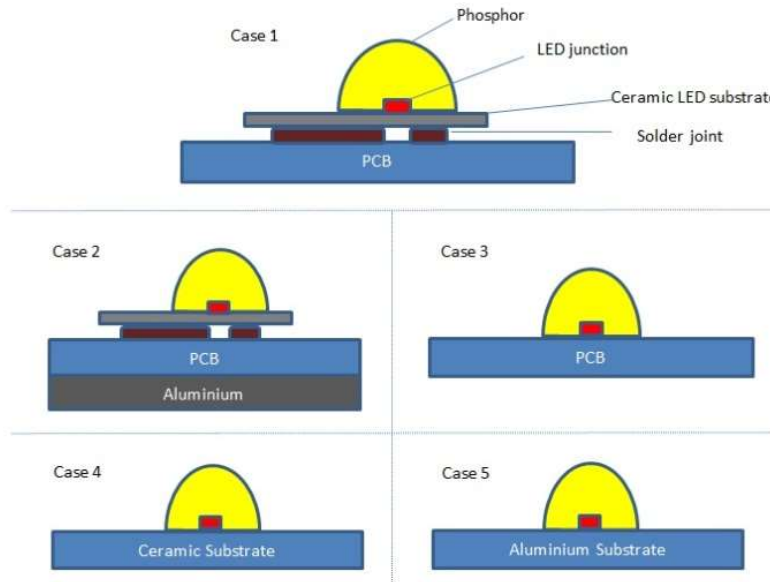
Cross-section of study cases. In Case 1, LED package is surface mounted on PCB substrate. In Case 2, LED package is surface mounted on PCB and aluminum substrate. In Case 3, LED chip is directly mounted on PCB board. In Case 4, LED chip is directly mounted on ceramic board. In Case 5, LED chip is directly mounted on aluminum spreader.
